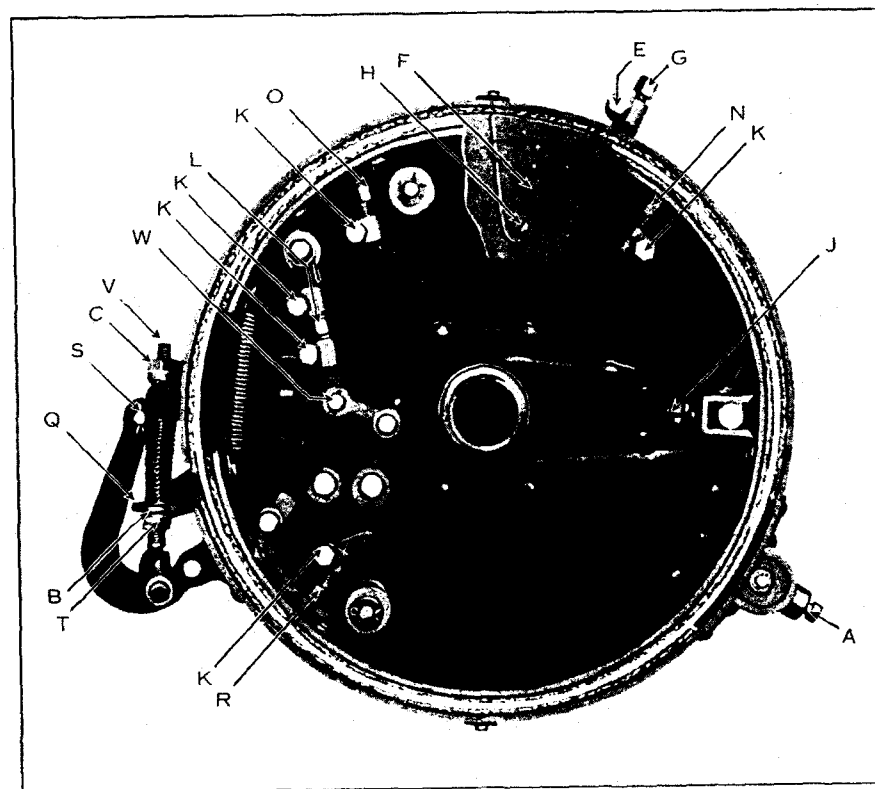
Rear Wheel Brakes (Wheel Removed)
